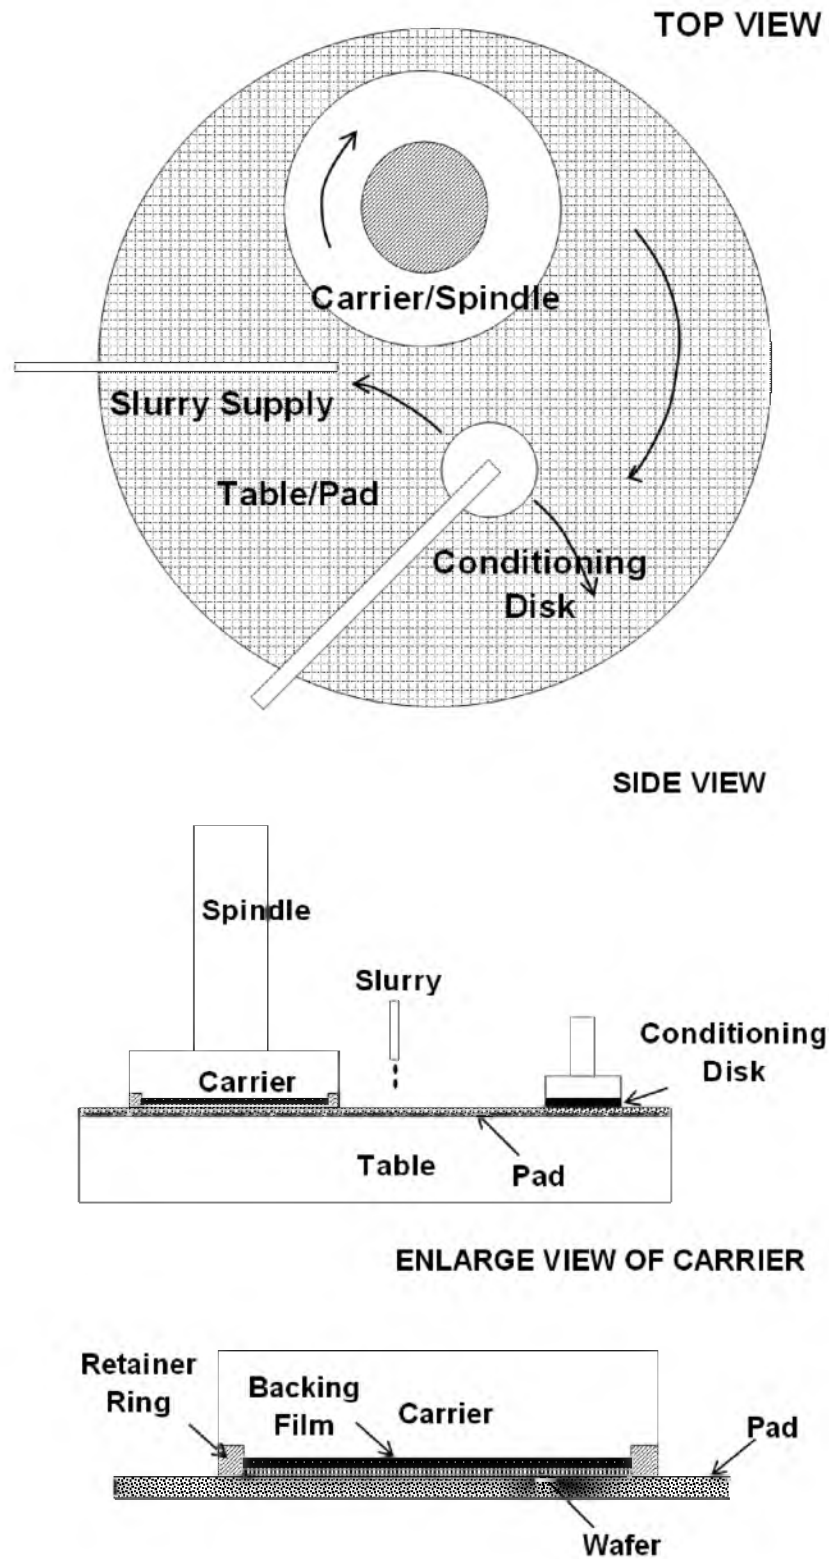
Top view and side view of a CMP tool and enlarged view of the carrier
